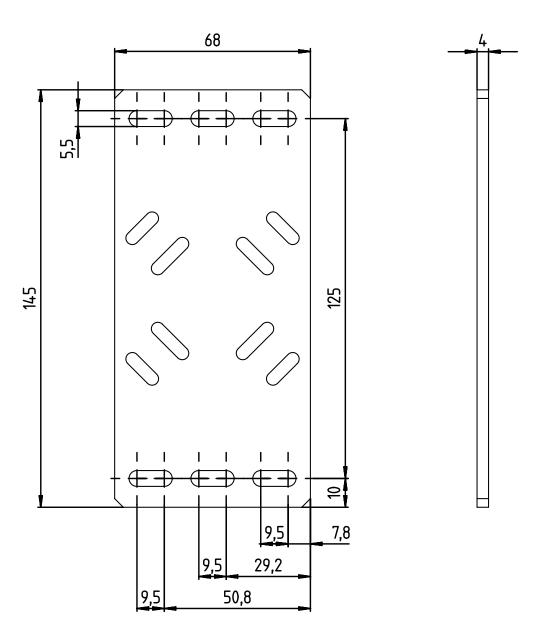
Dimensioned drawing BT 0100 M All dimensions in mm
